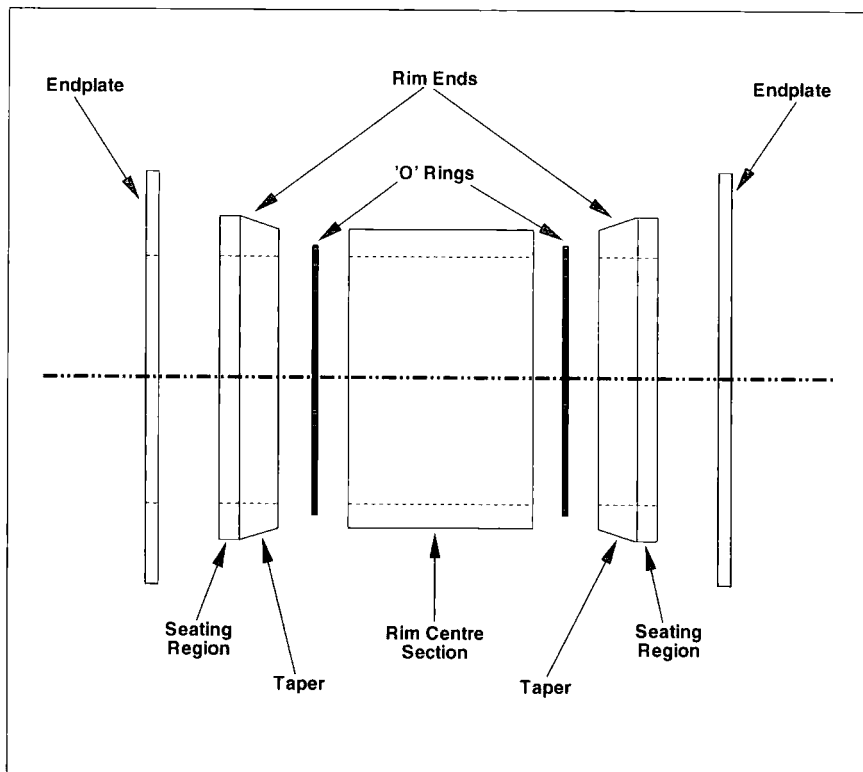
Schematic Exploded View of the Multi-Element Wheel Rim Assembly.
